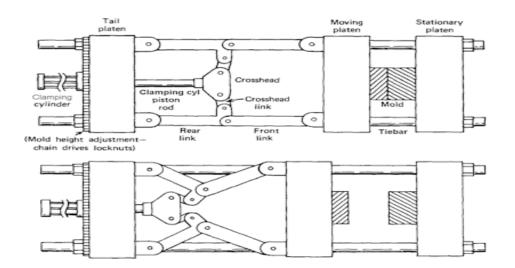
Opening and Closing Position for Toggle Mechanism [1]
